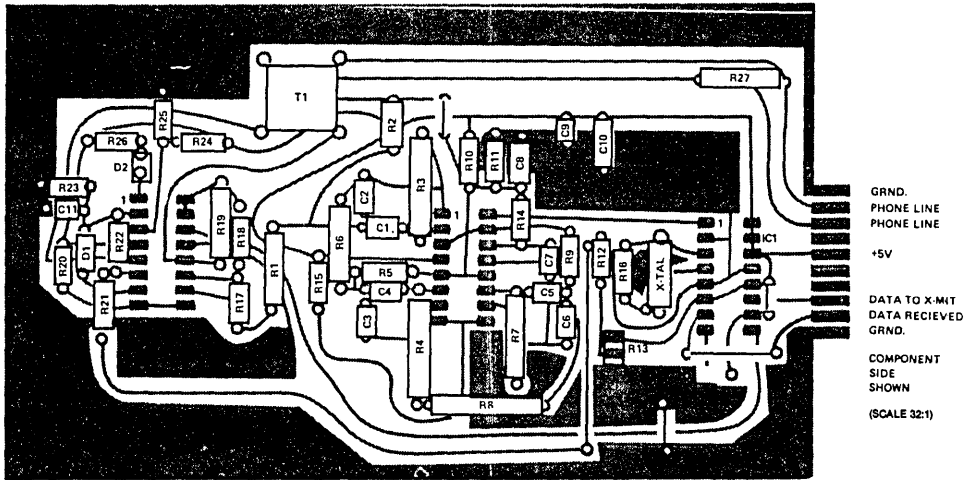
Complete FSK Modem Printed Circuit Board Layout
